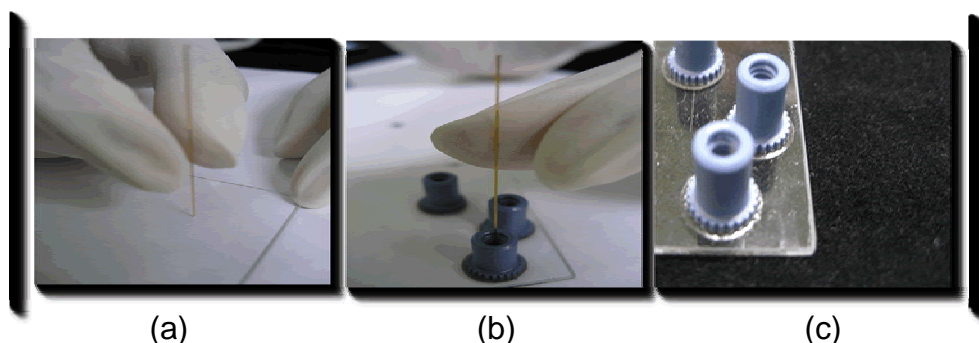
Aligning coned port on Chip: (a) Insert capillary into machined hole (b) Thread prepared coned port through capillary and center (c) Remove capillary and apply pressure to port making sure it doesn't get displaced
